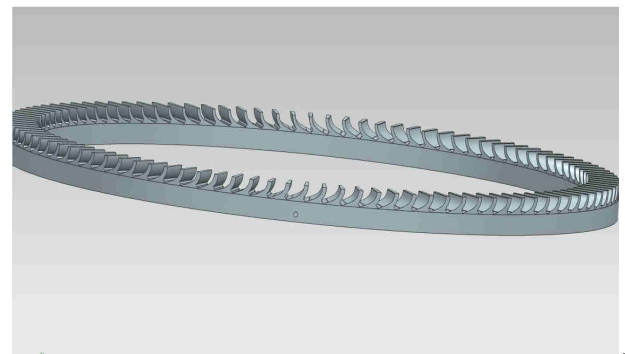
Electrode D for machining Asymmetric blade of LPOT turbine rotor
